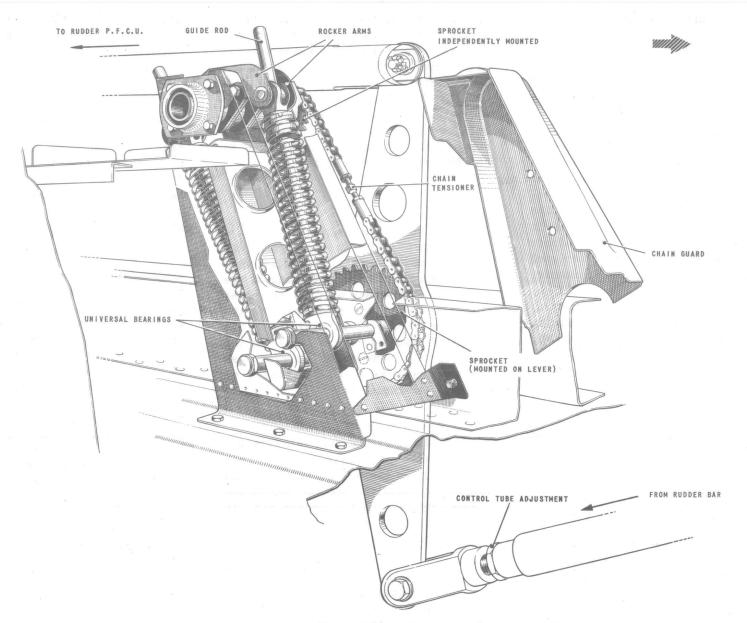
NON-LINEAR SPRING FEEL MECHANISM
